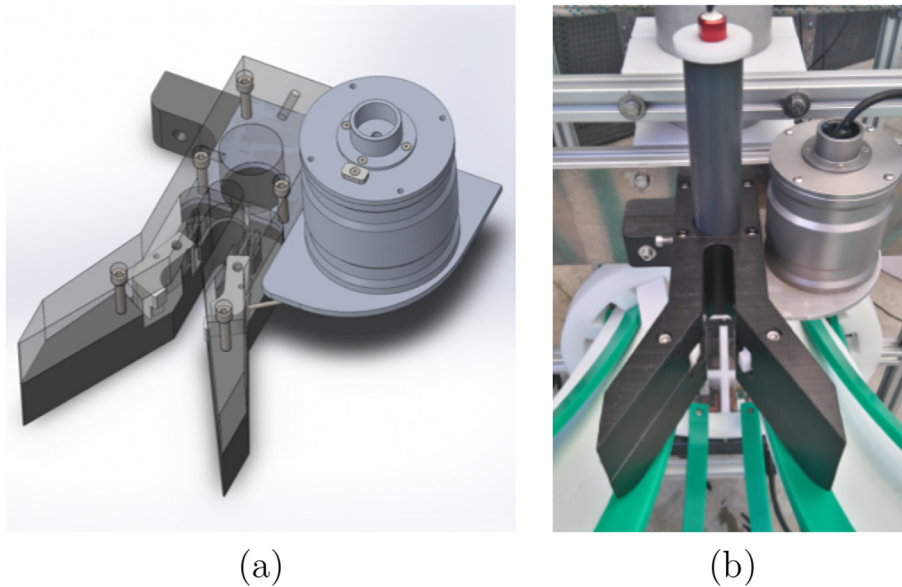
(a) CAD model of the latching mechanism and (b) picture of the real latching mechanism.
